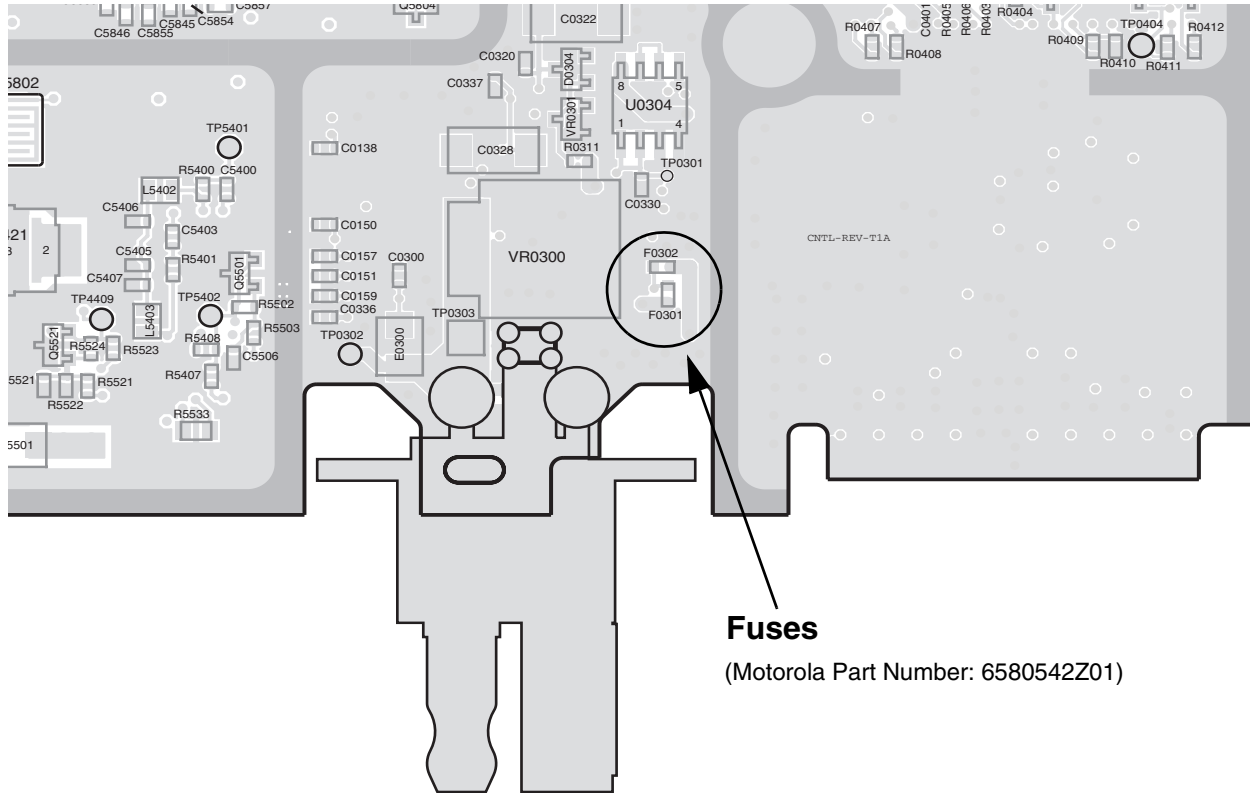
Position of Fuse F0301 and F0302 (PCB Mainboard - Bottom View)
